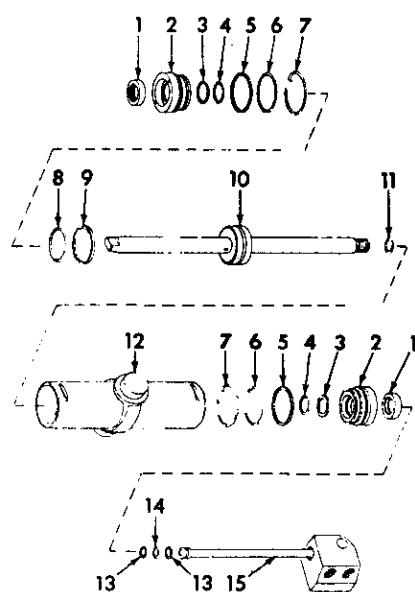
Exploded view of double acting steering cylinder used on Series 424, 444, 2424 and 2444 equipped with narrow tread front axle.
